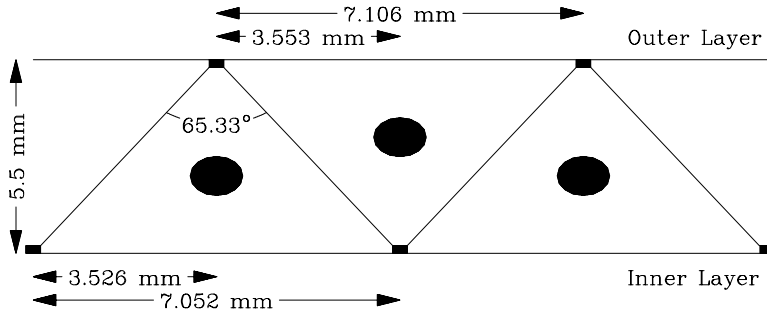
Shown is the proposed dimensions of the axial strips. The difference in the dimensions of the inner and outer layers is highlighted.
